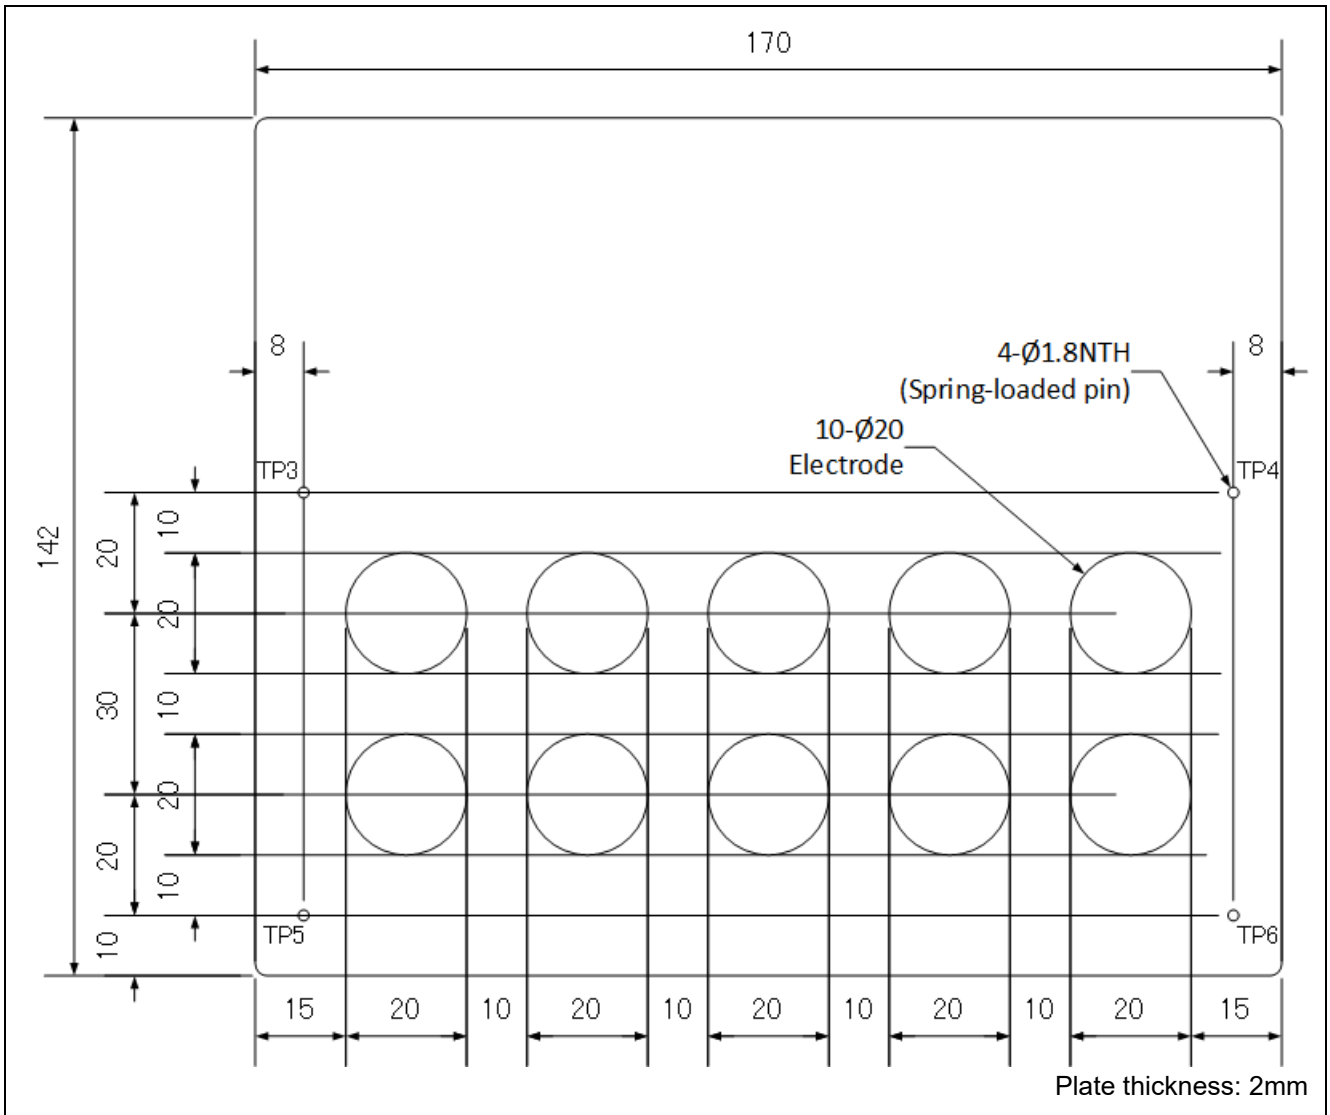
Dimension of electrode section of touch electrode board (unit: mm)
